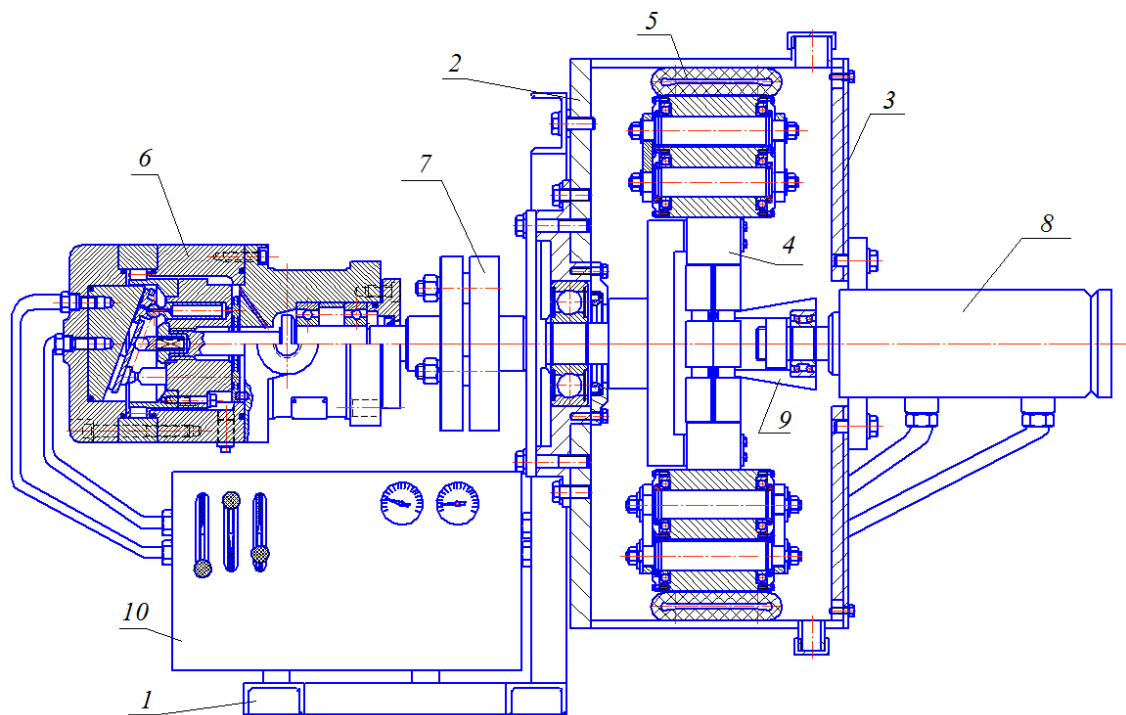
Scheme of a hydraulic drive with an adjustable hydraulic motor: 1 – frame; 2 – housing of the drive machine; 3 – housing cover; 4 – rotor with rollers; 5 – flexible hose; 6 – hydraulic motor; 7 – coupling; 8 – hydraulic cylinder; 9 – conical tip; 10 - hydraulic distribution
